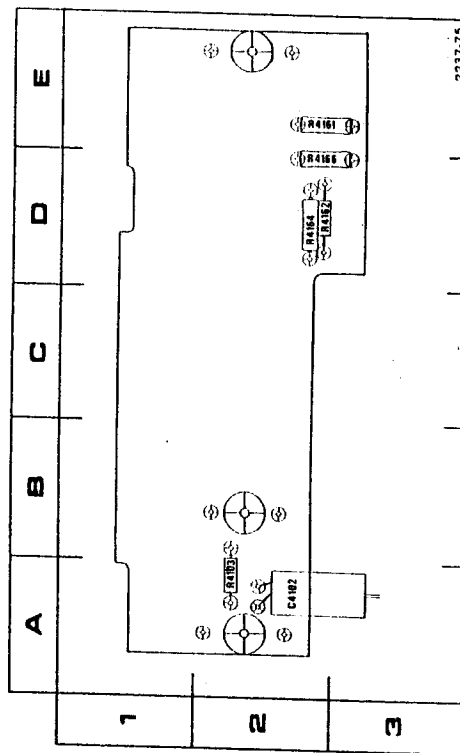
A1 Cam Switching board (bottom) component locations.
